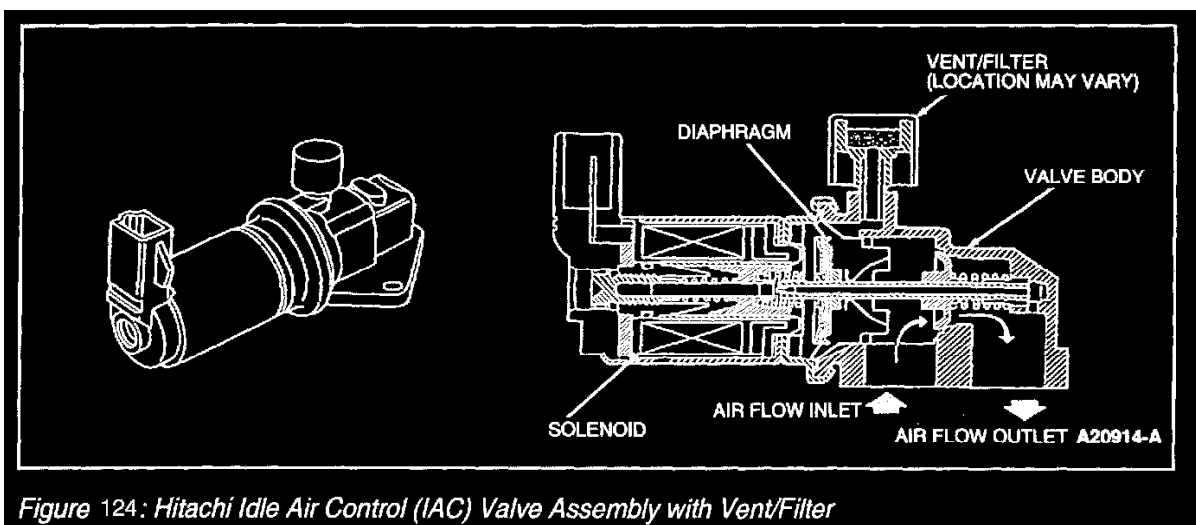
Hitachi Idle Air Control (IAC) Valve Assembly with Vent/Filter
